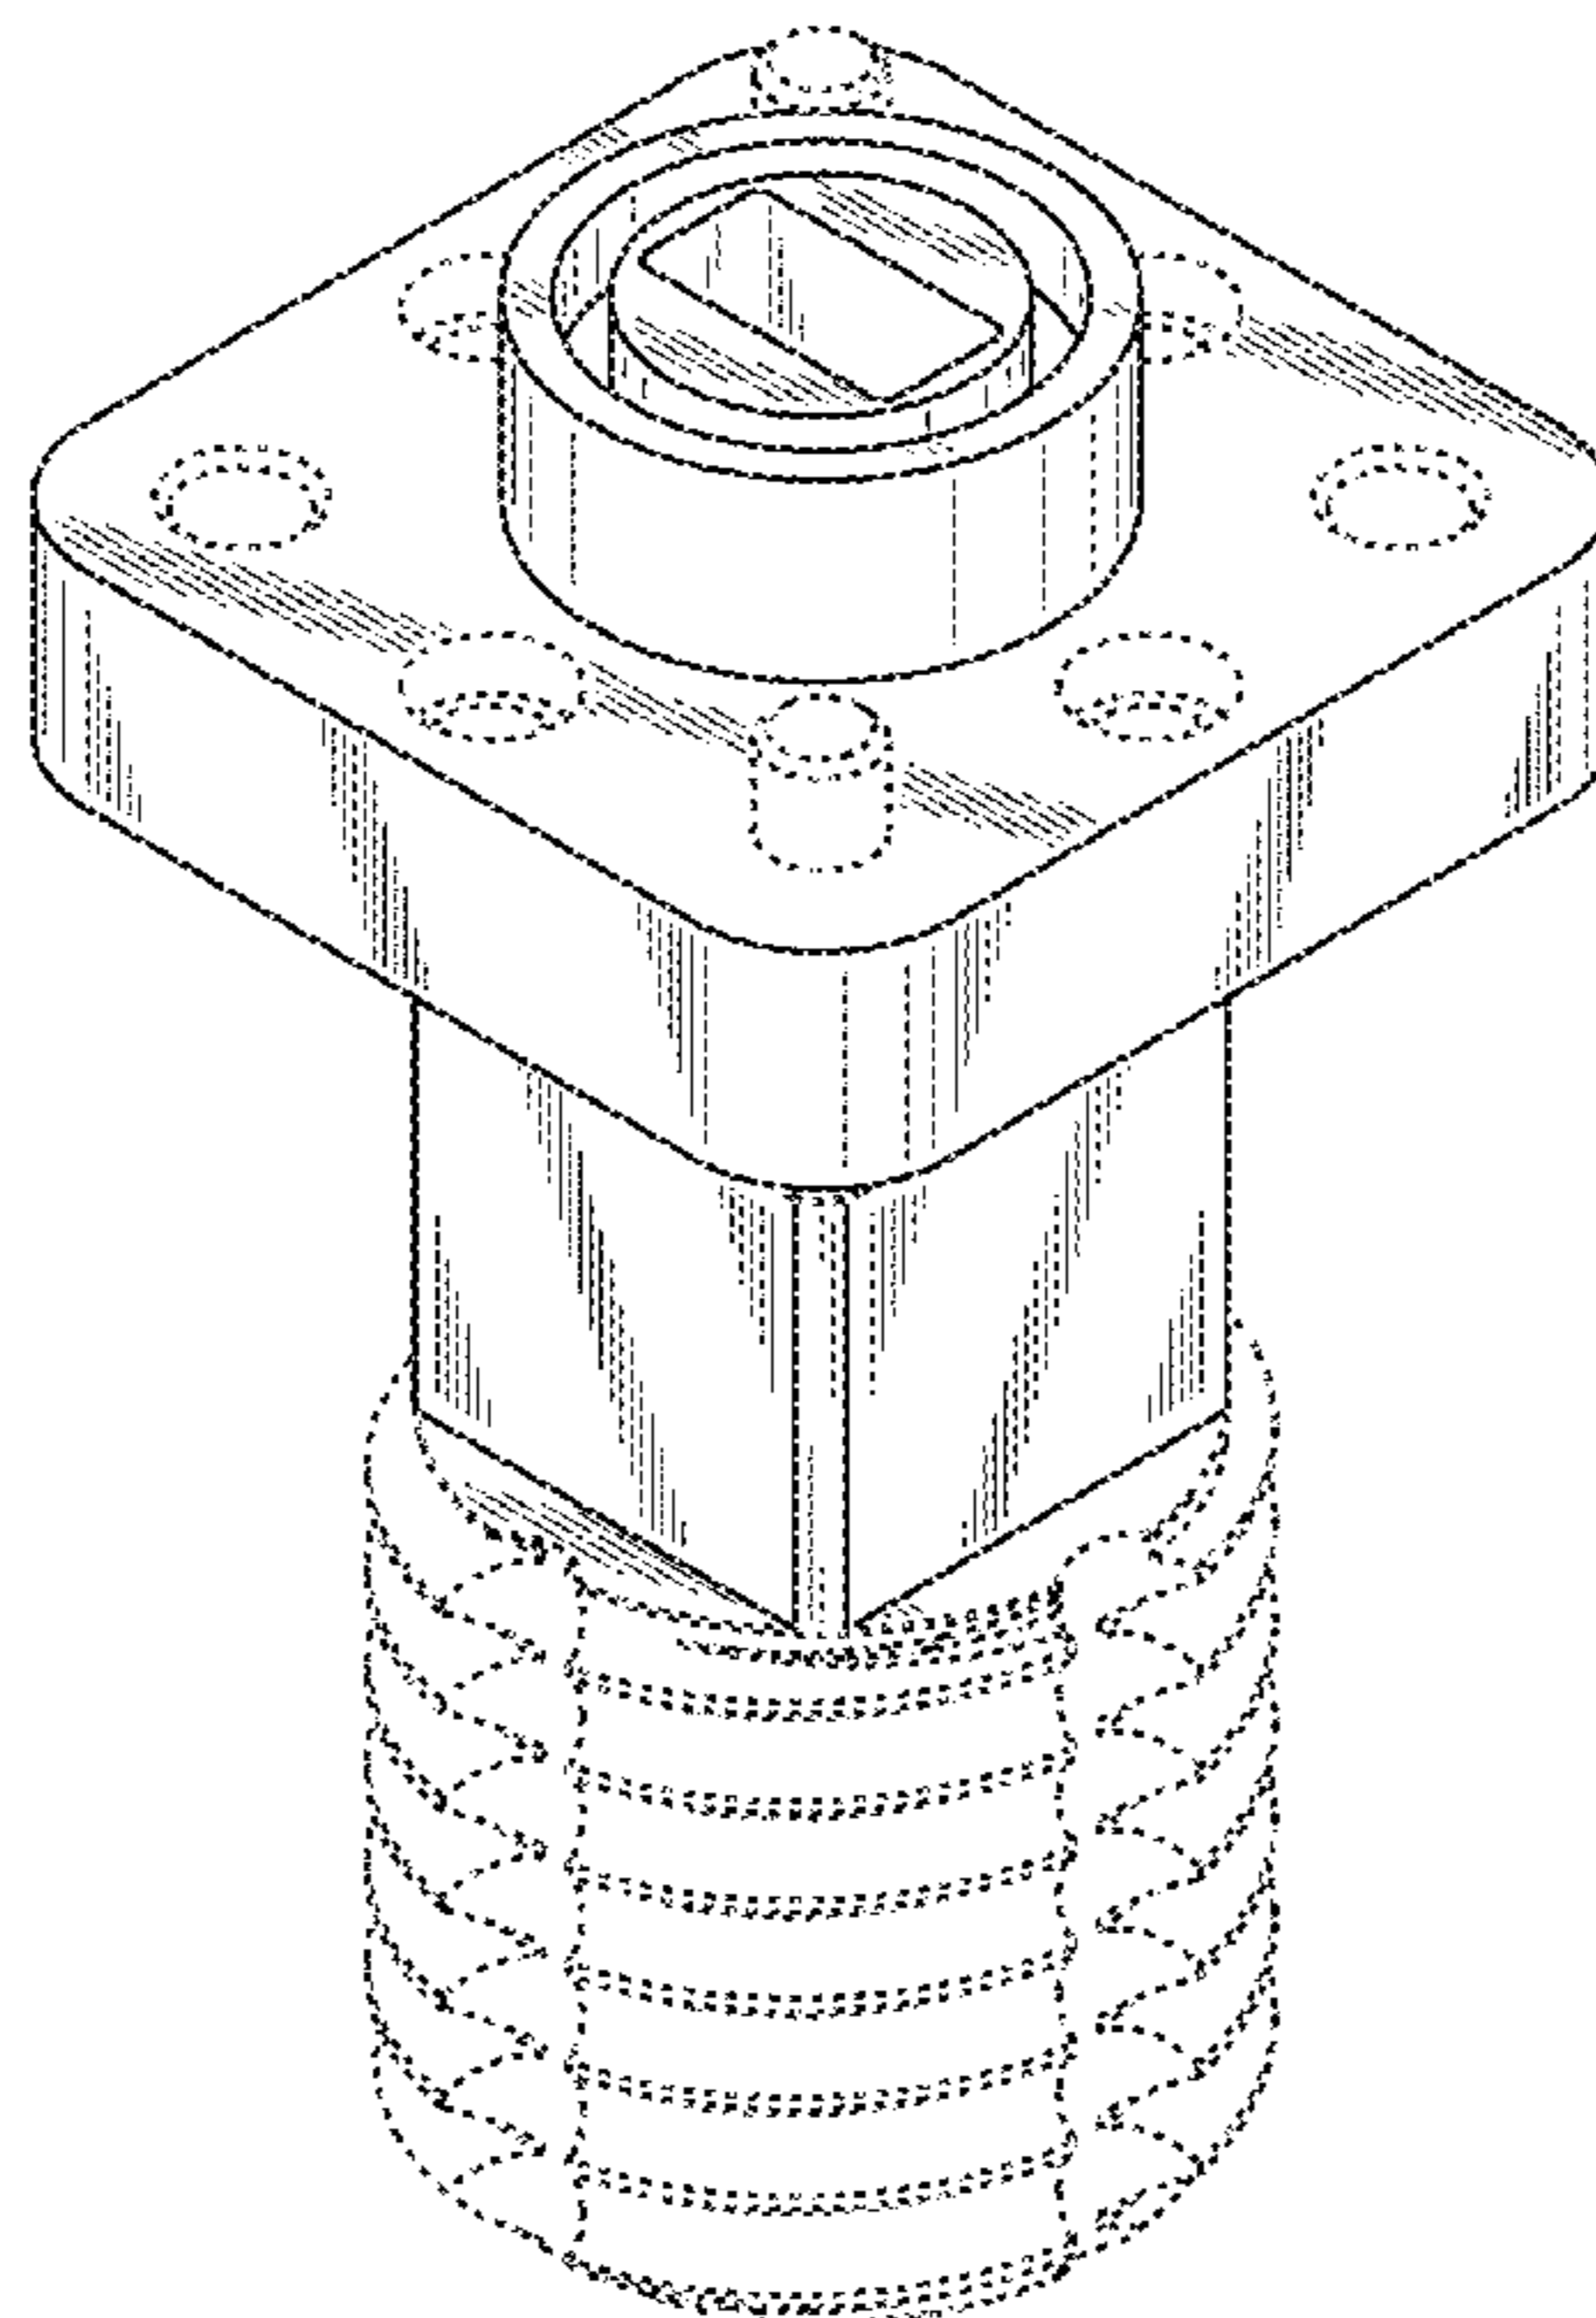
is a top front right perspective view of a blind mate waveguide flange;
